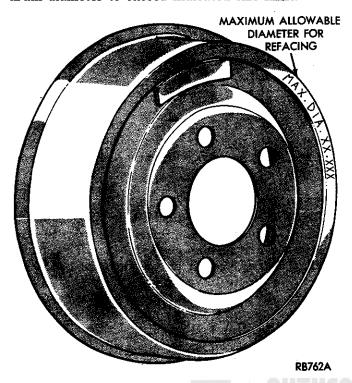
Location Of Brake Drum Maximum Allowable Diameter
